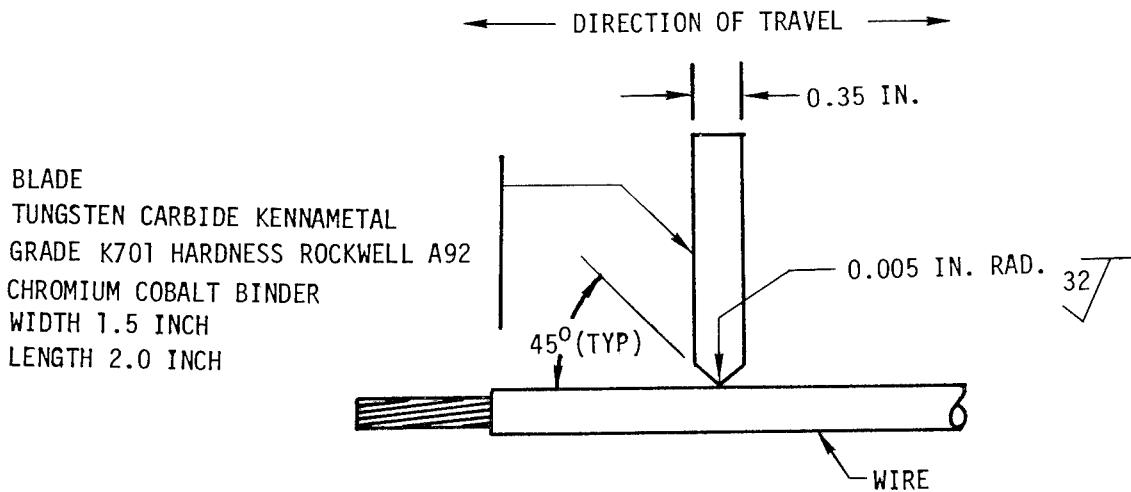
SCRAPE ABRASION BLADE DETAILS
